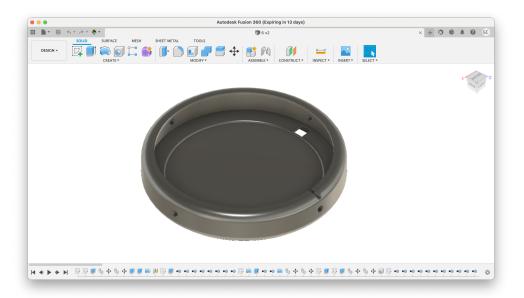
Final - 1 piece design design for printing, as seen from bellow
